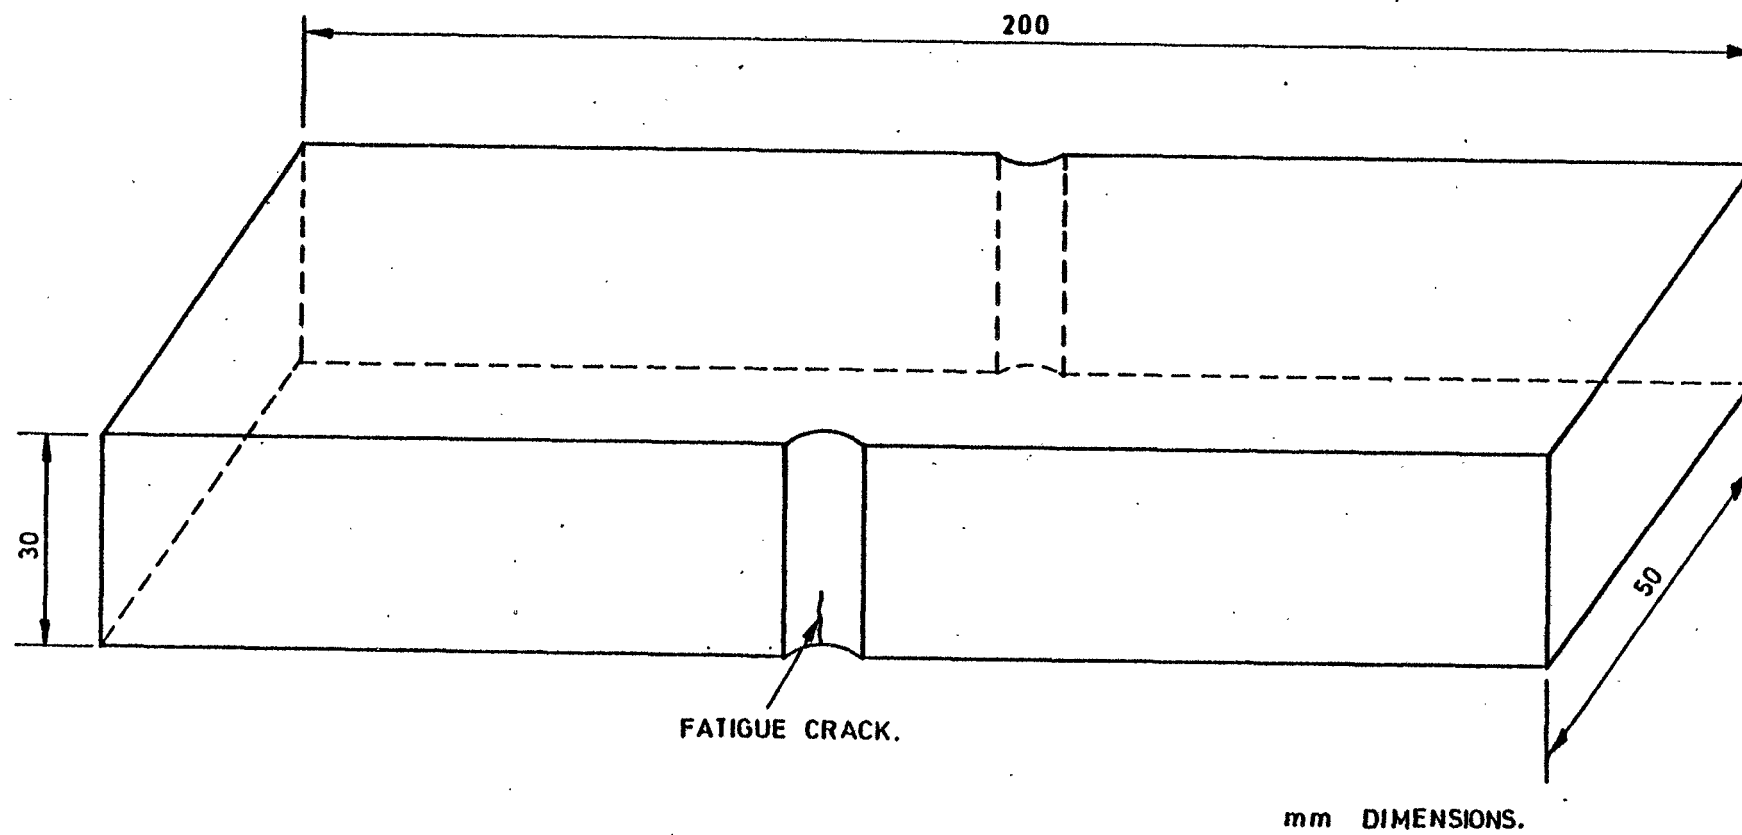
(b). FATIGUE CRACK SPECIMEN AFTER REMOVAL OF STARTER NOTCH.
